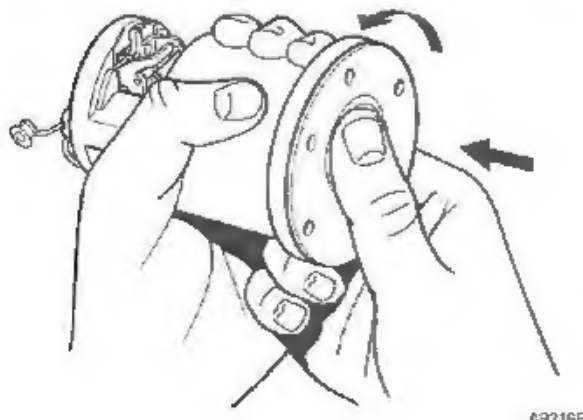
Setting the diaphragm. Unscrew until the rocker just 'throws over'.
